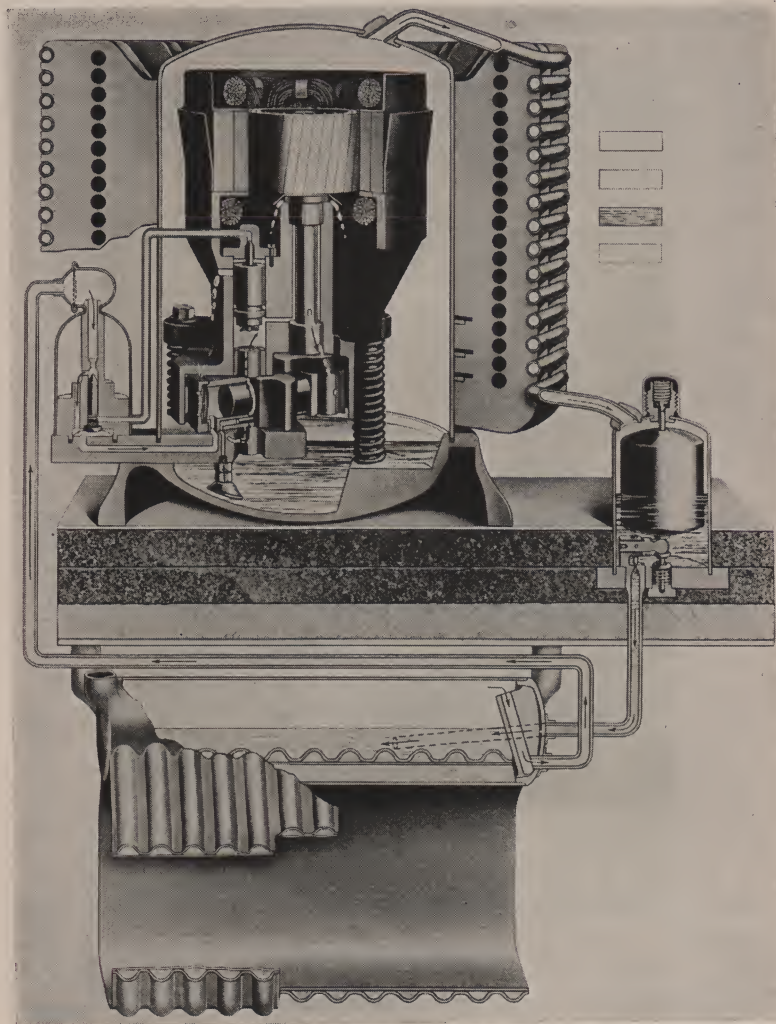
CUTAWAY VIEW GENERAL ELECTRIC ICING UNIT.
